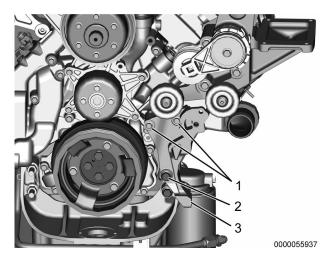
Auxiliary accessory mounting bracket (if equipped)
